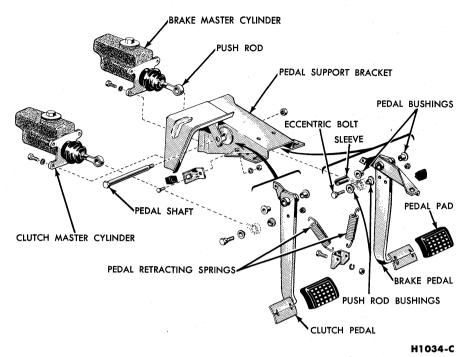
B-, F-, N-, or T-Series and P-100 Brake Pedal and Related Parts
